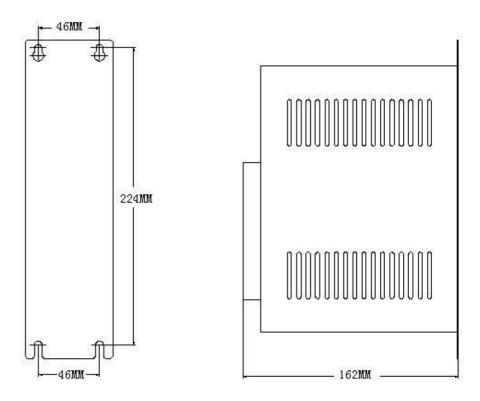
Installation Dimensions for the Servo Driver of 30A/30A
